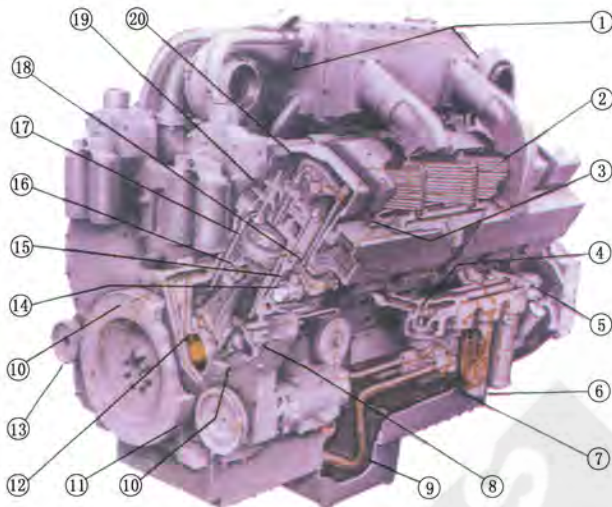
Lubricating oil flow (3/4 front view KTA-38)
